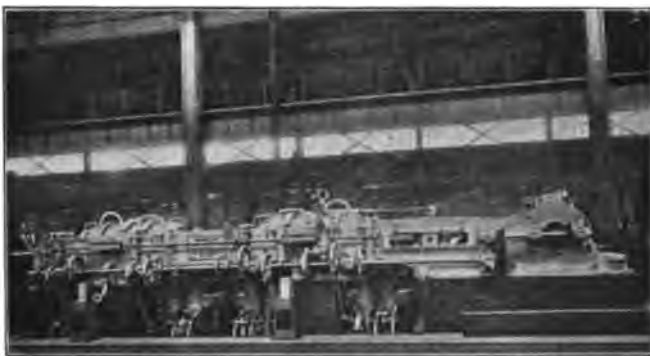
Cockerill Double-acting Tandem Engine
